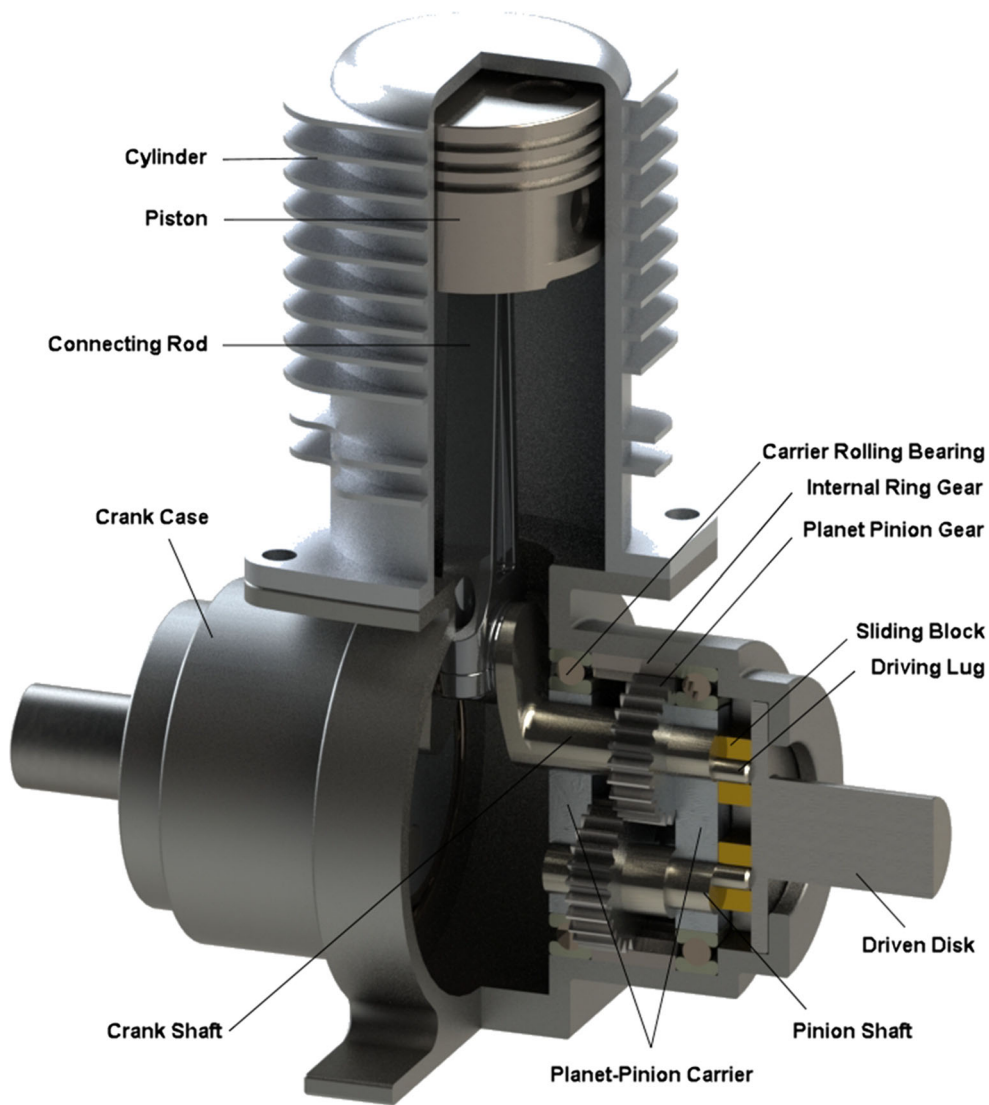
Sectional assembly view of the single cylinder and associated HGM assembly
